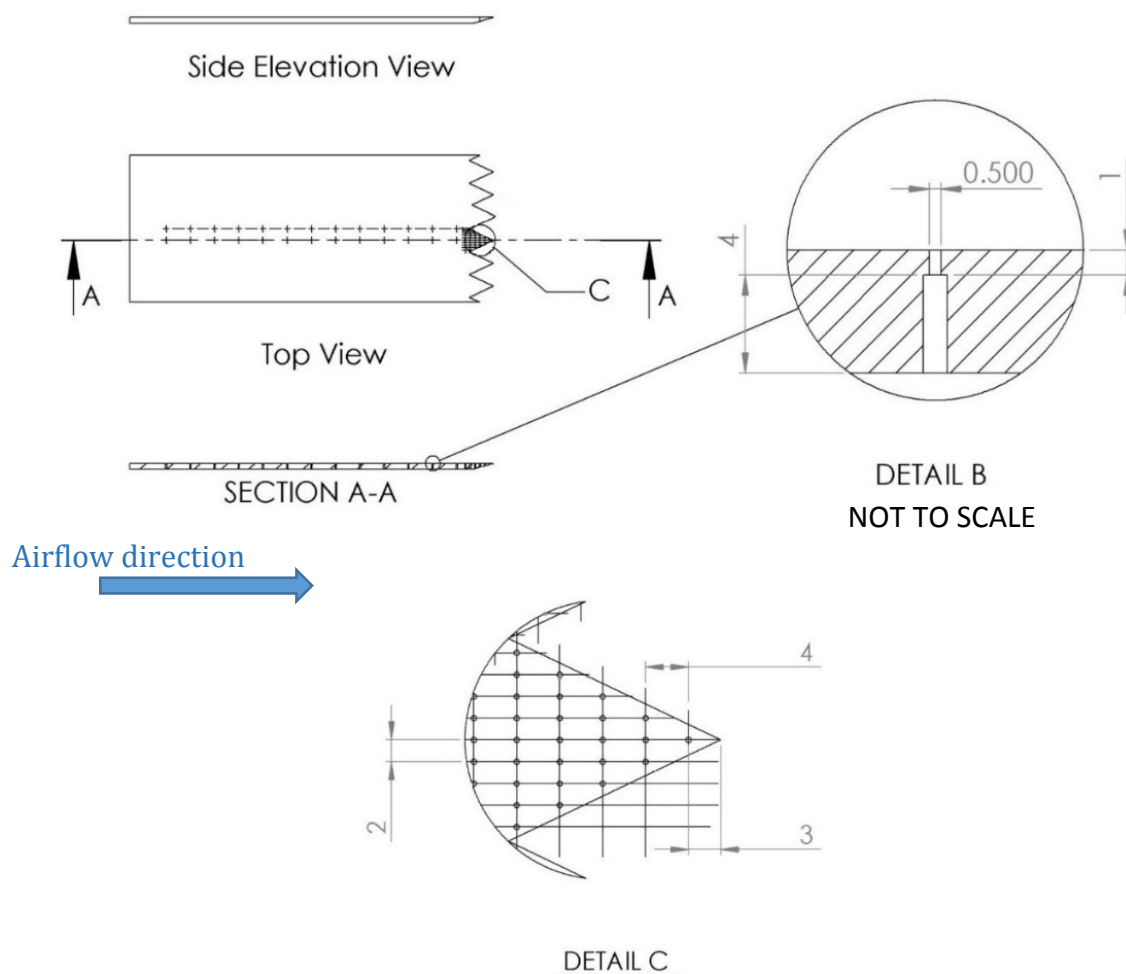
Drawing of the serrated Perspex flat plate for the surface pressure measurements through the designed tapings. The same plate was used for hot-wire anemometry measurements. Dimensions displayed in millimetres.
